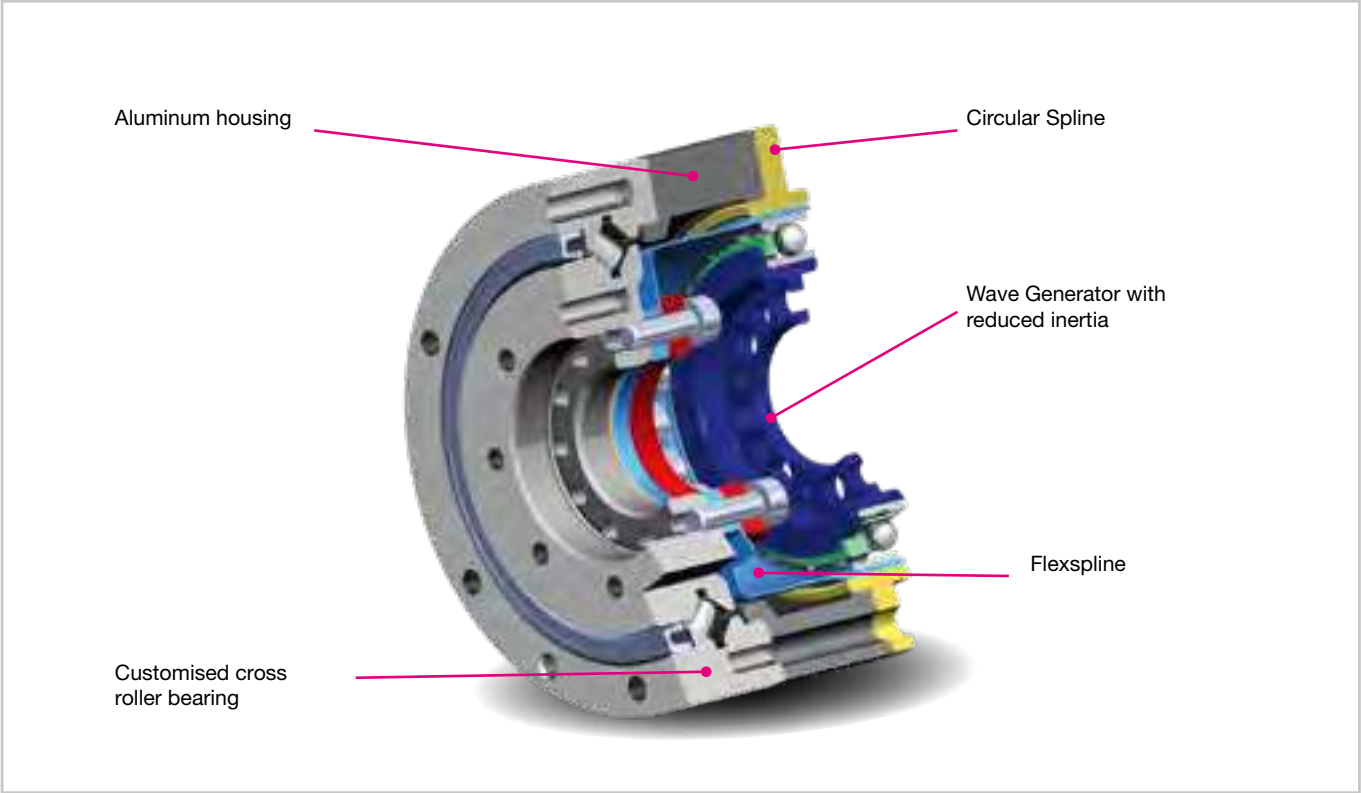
Gear for robotic axis with customised hollow shaft for adaptation of rotor magnets, encoder and brake
